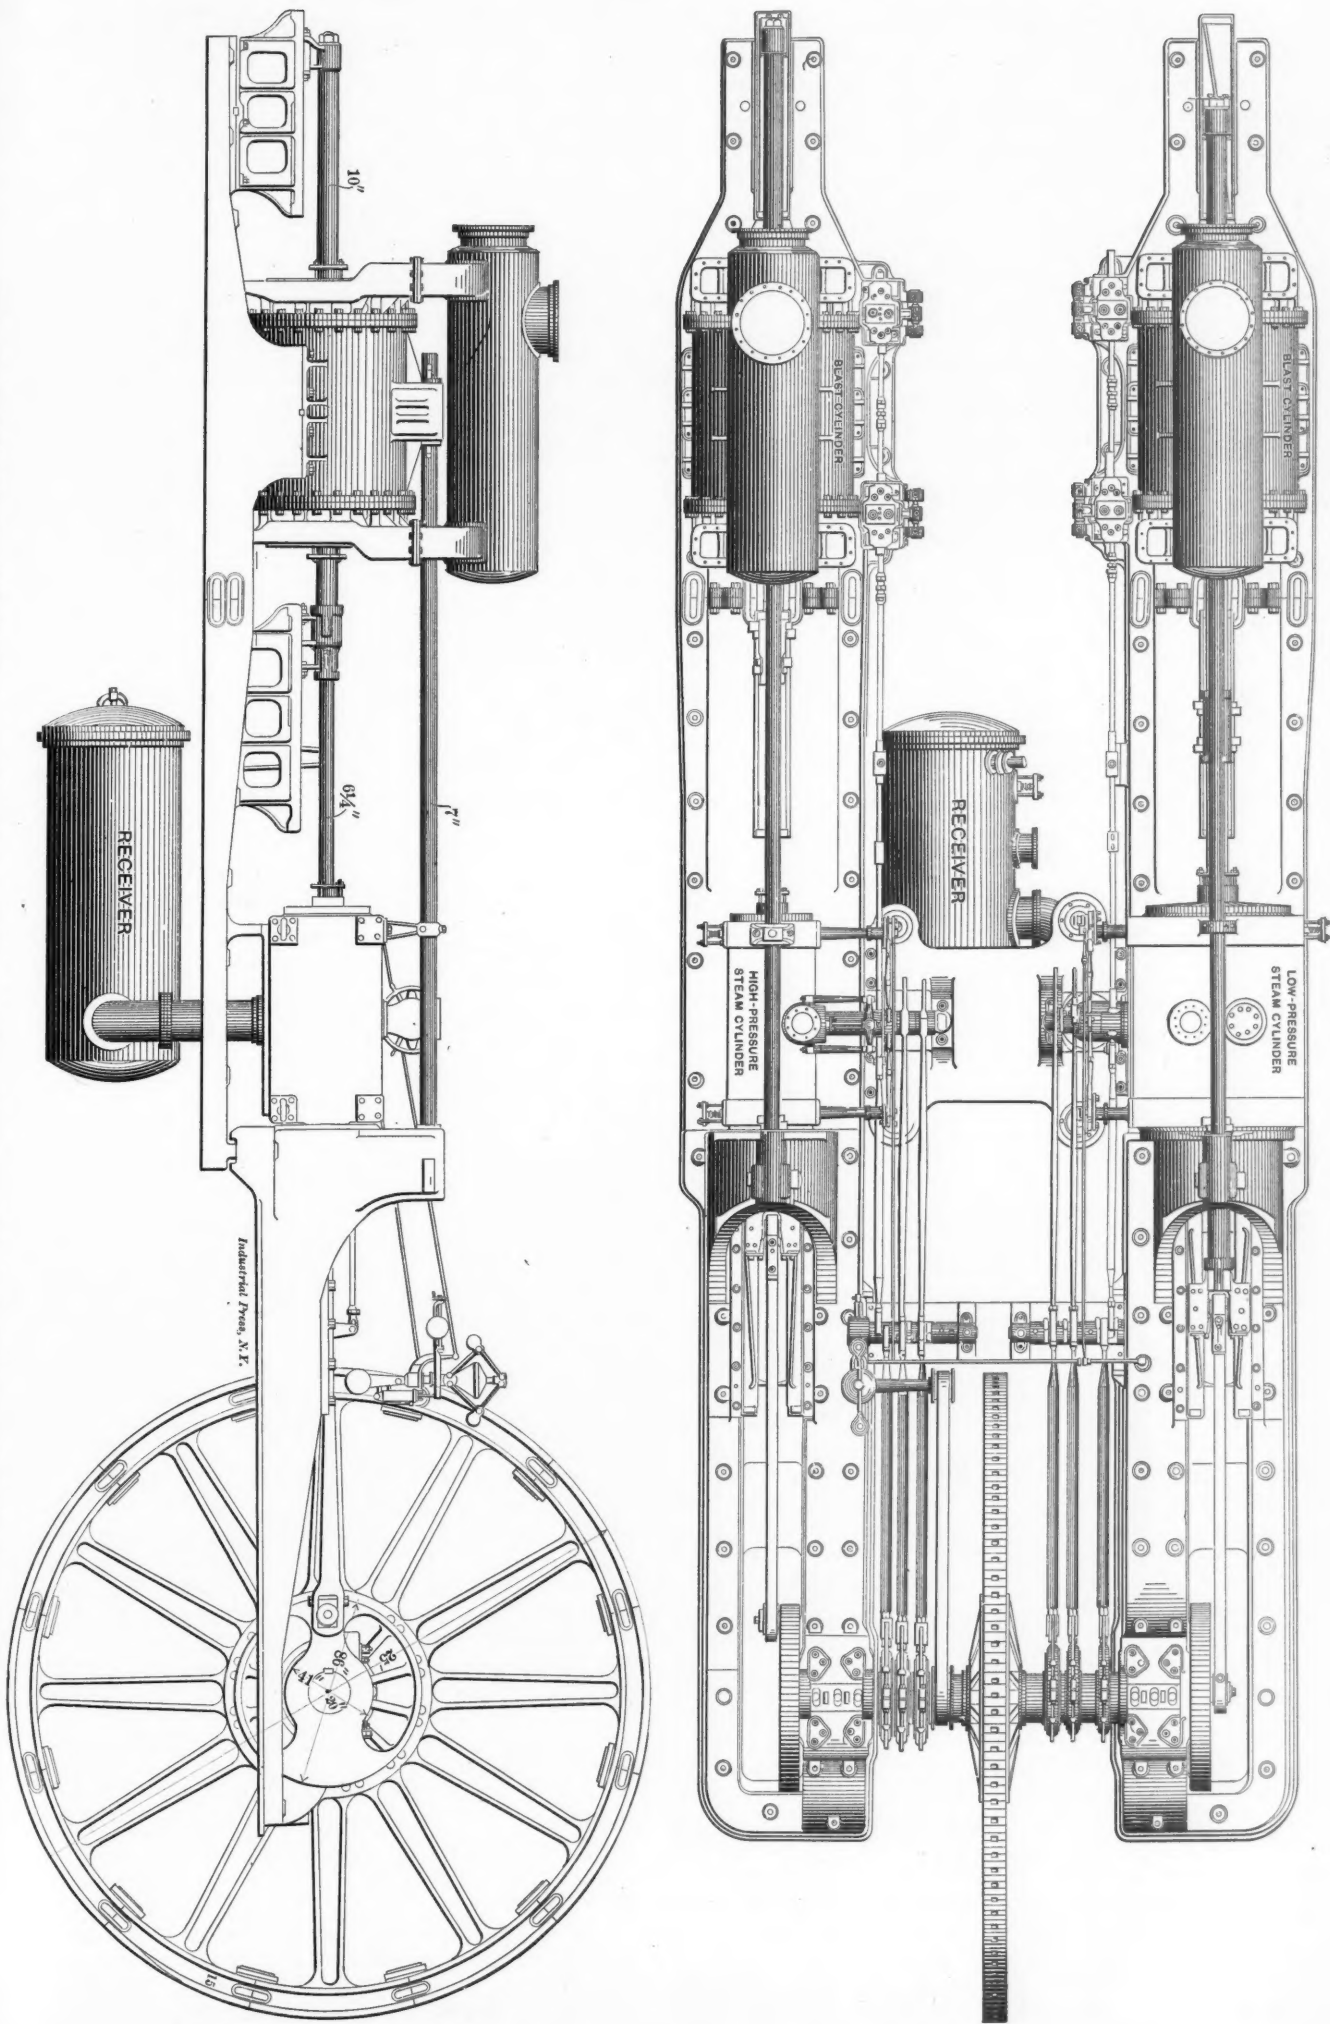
Plan and Side Elevation of Blowing Engine. Total Length over all, 77 feet 6 inches. Cross-compound Condensing Engine with Corliss Double Eccentric Valve Gear.
